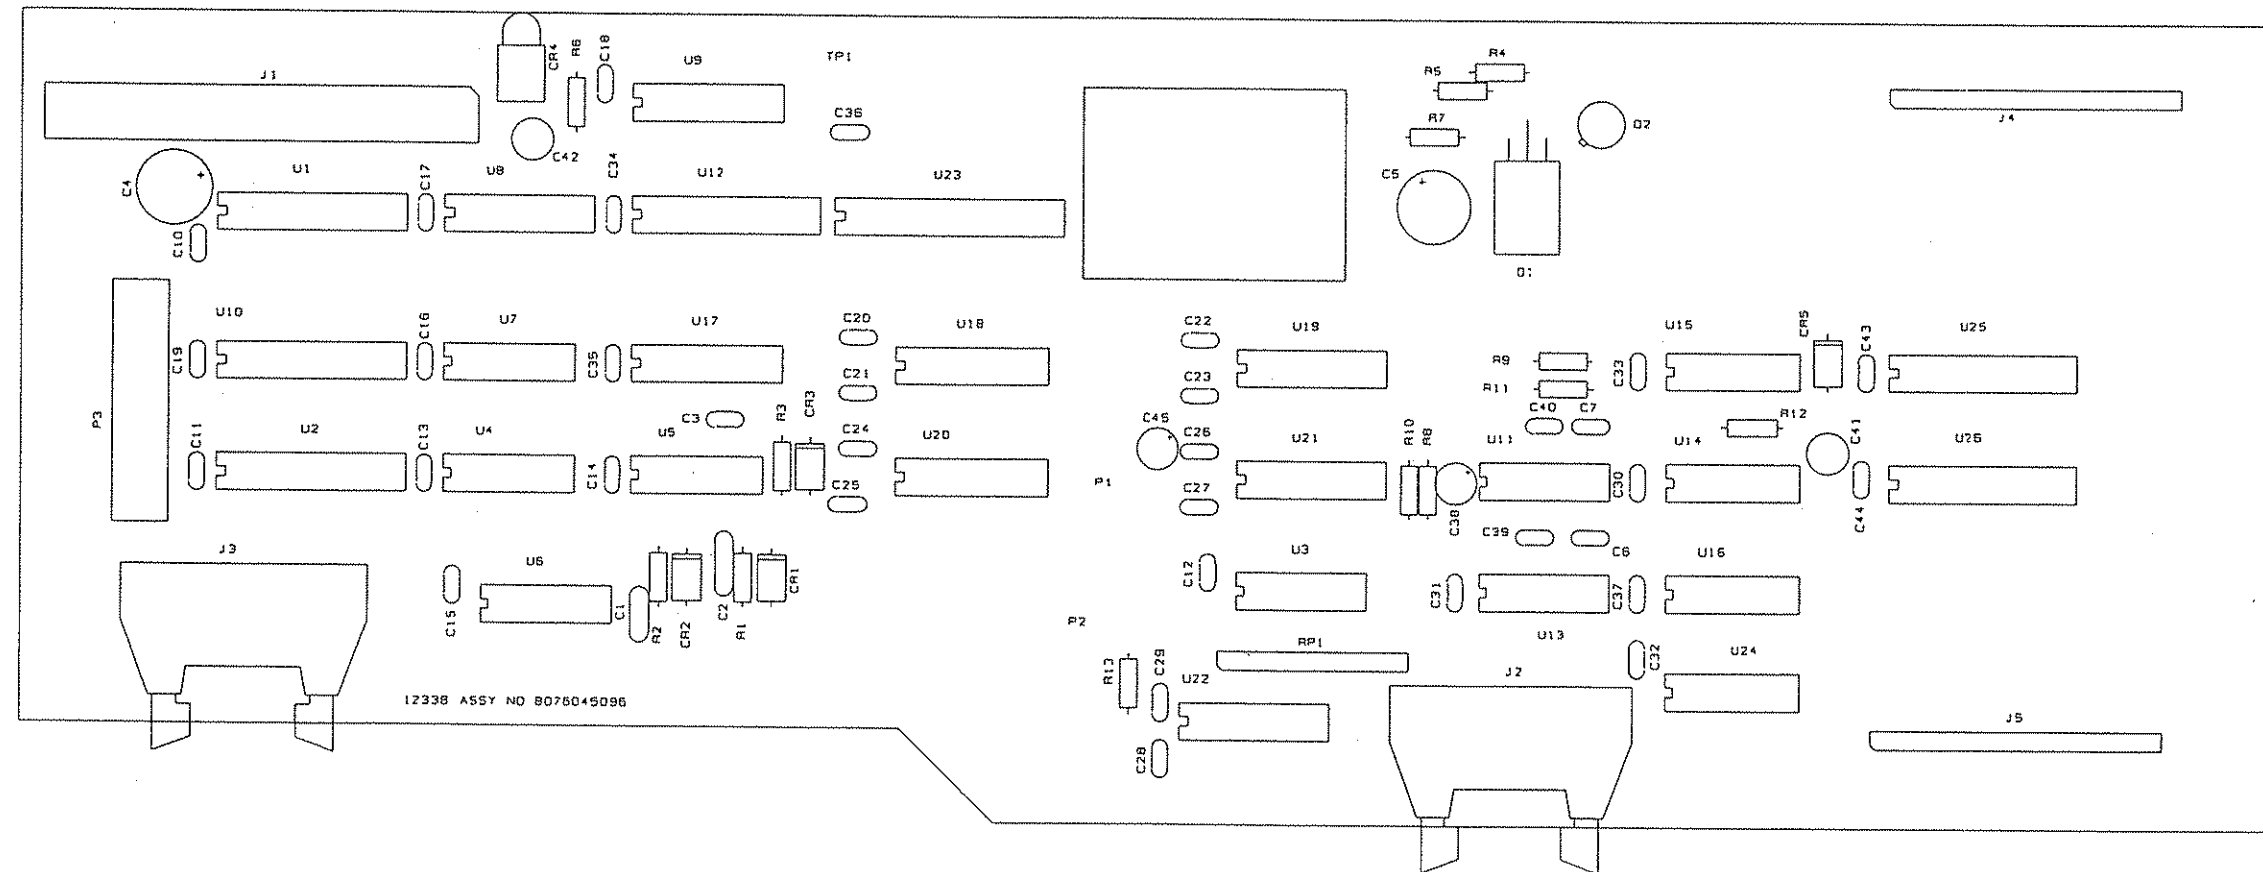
Front Panel Assembly 3A1A1, page 4 of 6.
